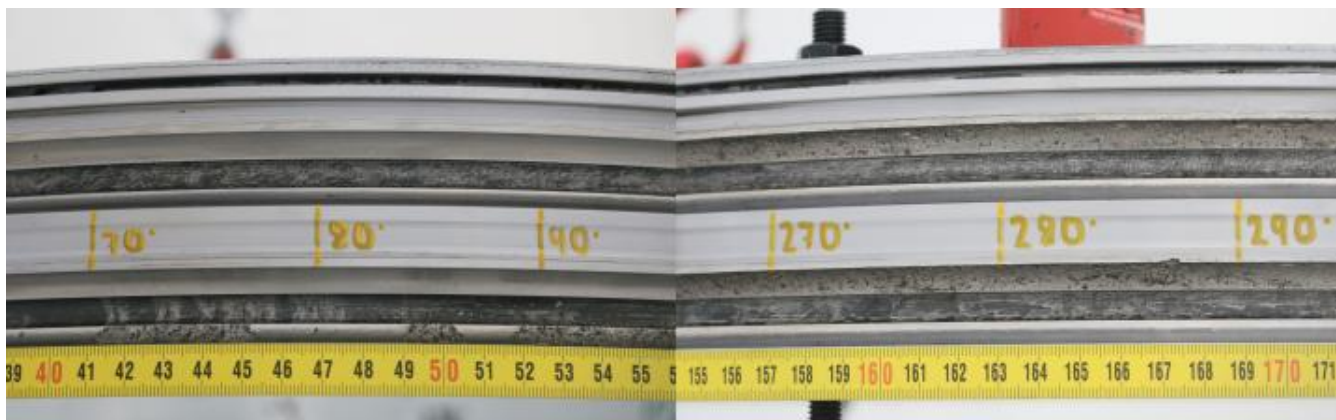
Damage on the inner ring of bearing 0498 at 80° and 280° ©Fraunhofer IWES/Oliver Menck, Deva Narayanan
